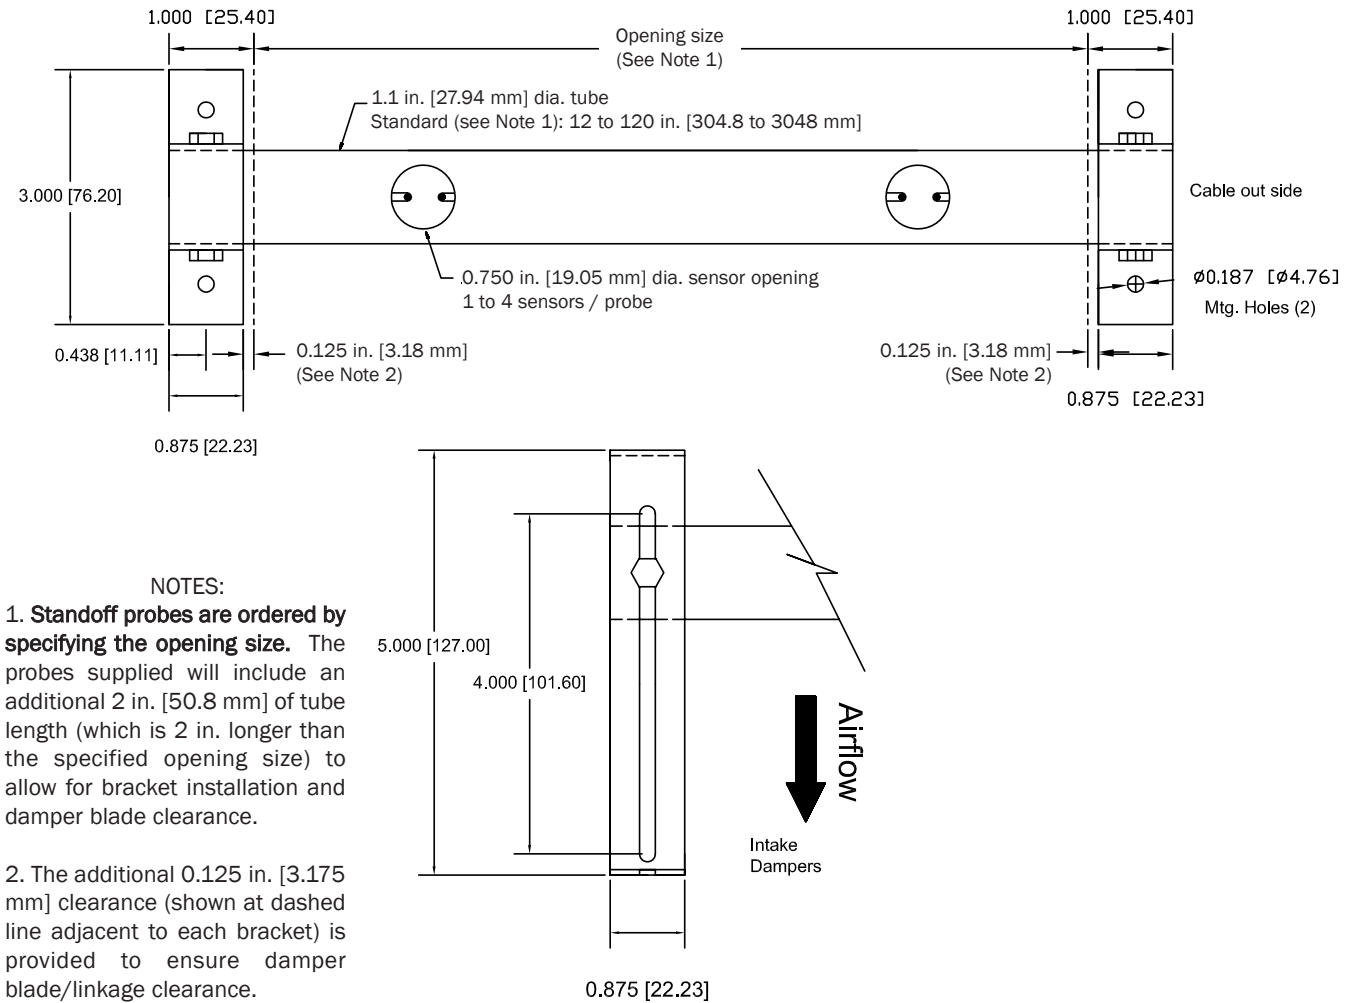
HP1/SP1 Standoff Mount Probe Mechanical Dimensions
